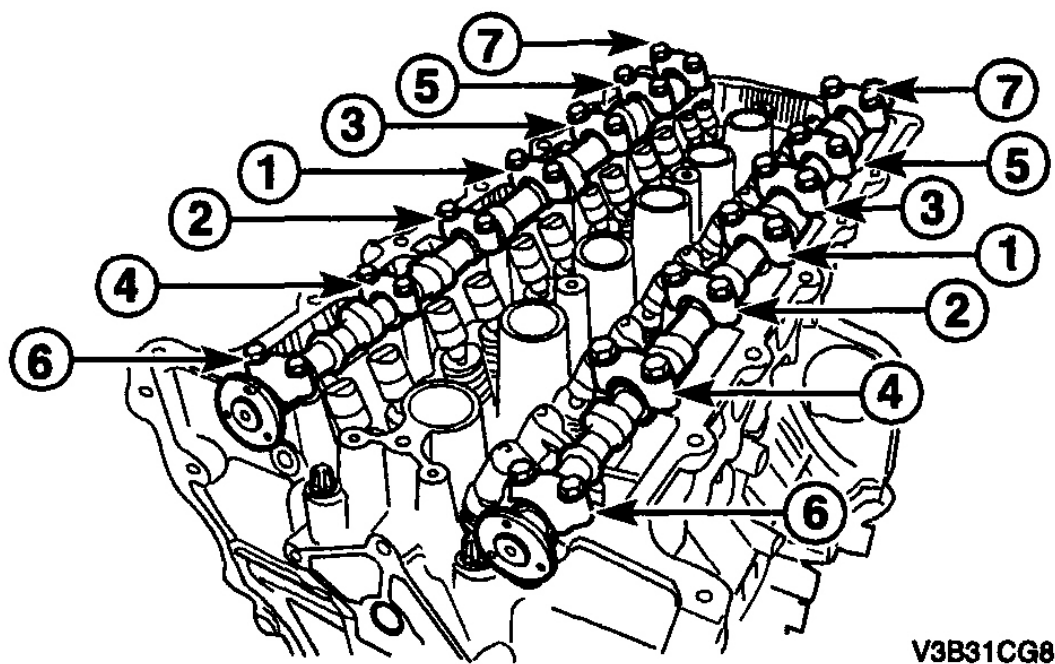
Identifying Camshaft Cap Bolts Tightening Sequence
